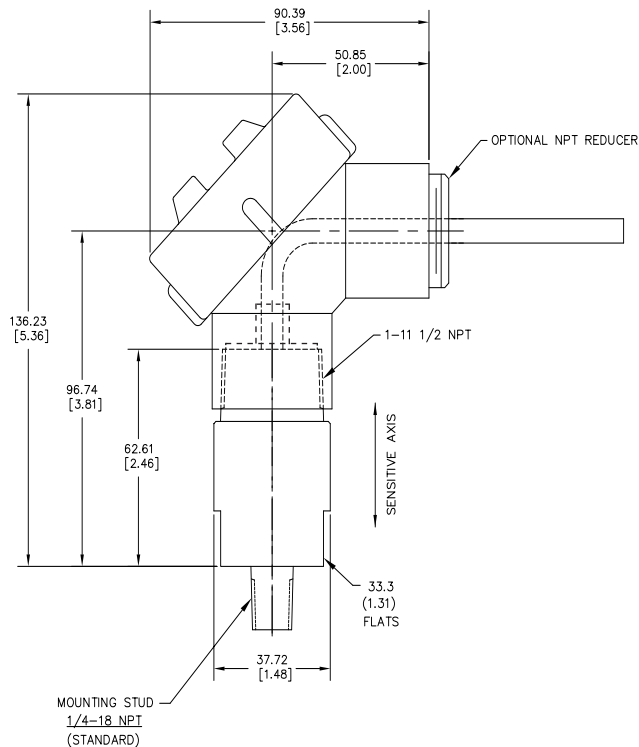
Outline dimensions of the SW5484E Flying Lead Version. Dimensions in mm [inches]. 8200-000 IEC conduit elbow shown installed, necessary for Explosion Proof rating.
